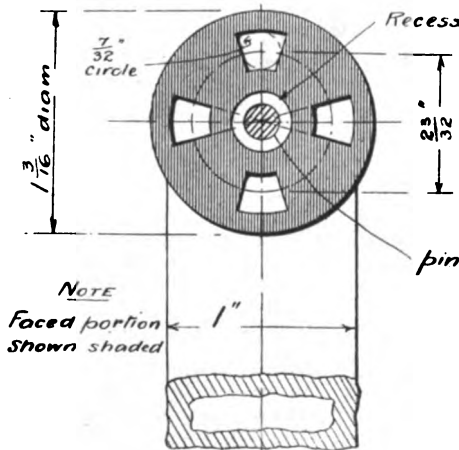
SKETCH SHOWING SETTING OUT OF RADIAL HOLES IN REGULATOR HEAD AND VALVE. (Full size for 2-in. scale model.)
